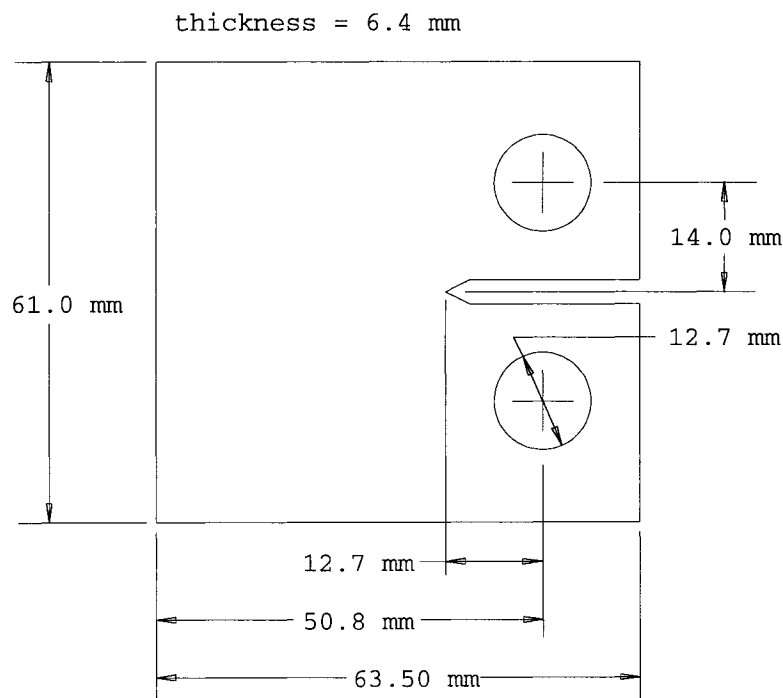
Standard compact tension specimen in accordance with ASTM E647 used in laboratory fatigue tests
